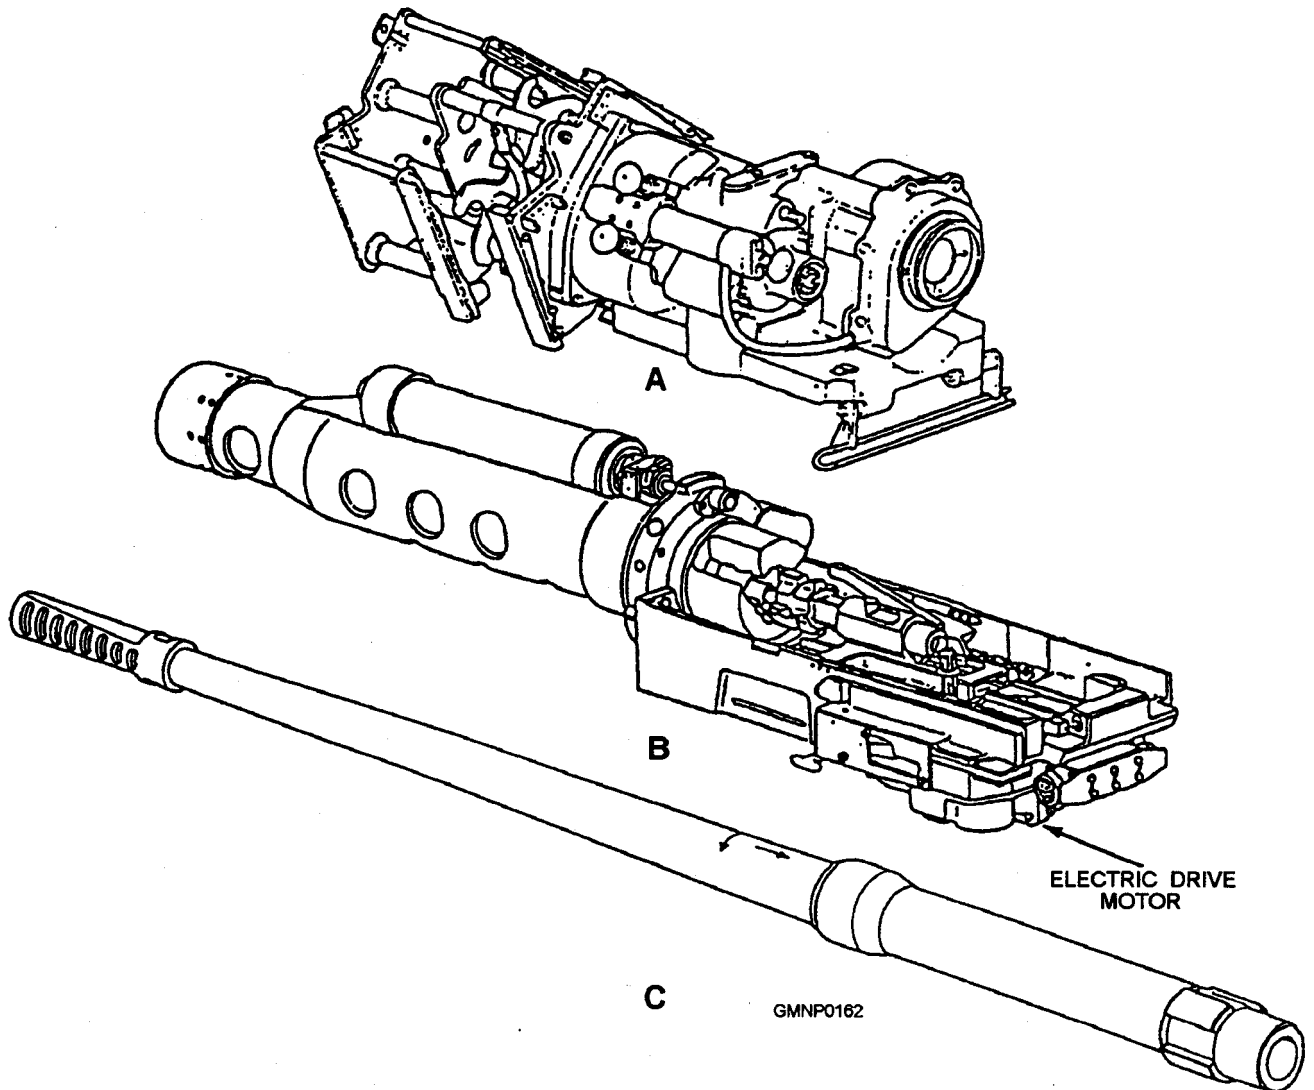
M242 major components: A. Feeder assembly B. Receiver; C. Barrel.
